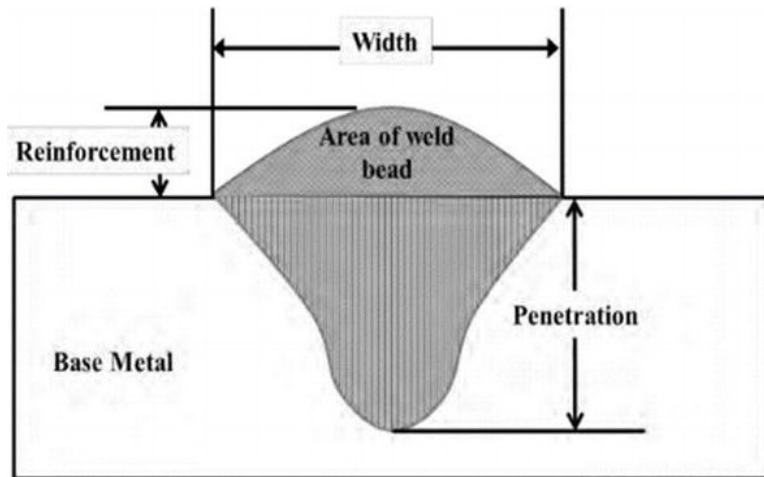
schematic illustration of the weld bead geometry (Alfaro., 2021b).
